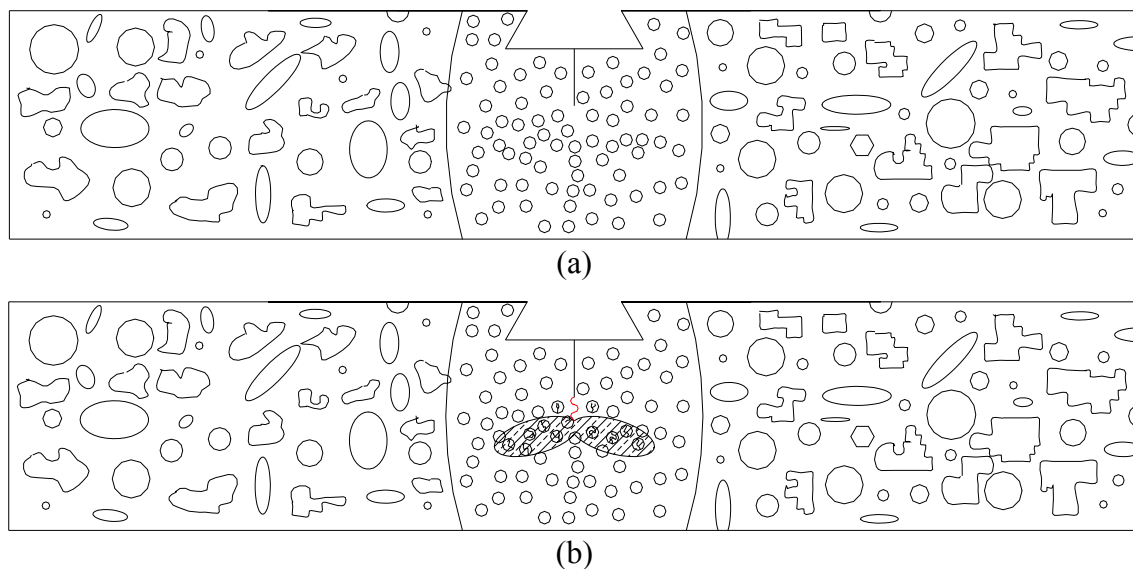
Fracture toughness behaviour of the friction welded joints.
